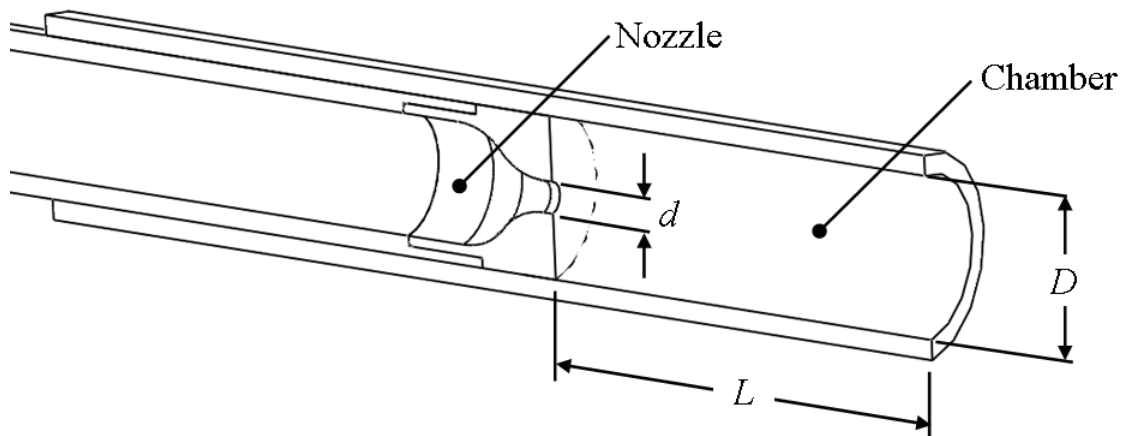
Sectioned view of a precessing jet nozzle in its simplest configuration (without a lip or center body), showing relevant dimensions and components.
